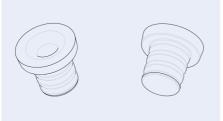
Schematic drawing male Luer plunger with ripped surface Fluidic 1539
